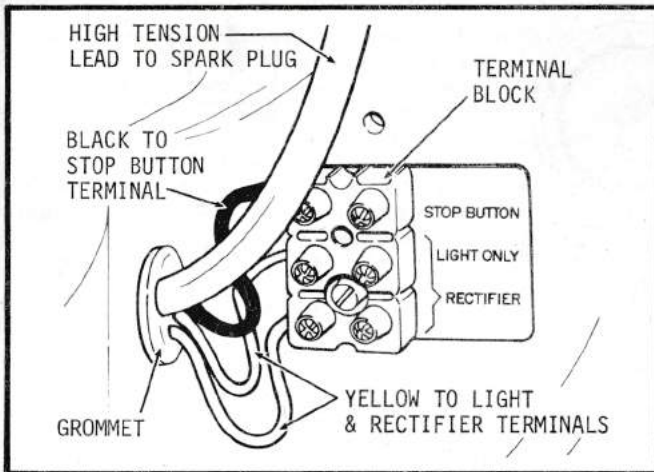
TERMINAL BLOCK ON METRIC K309-1 ENGINES
